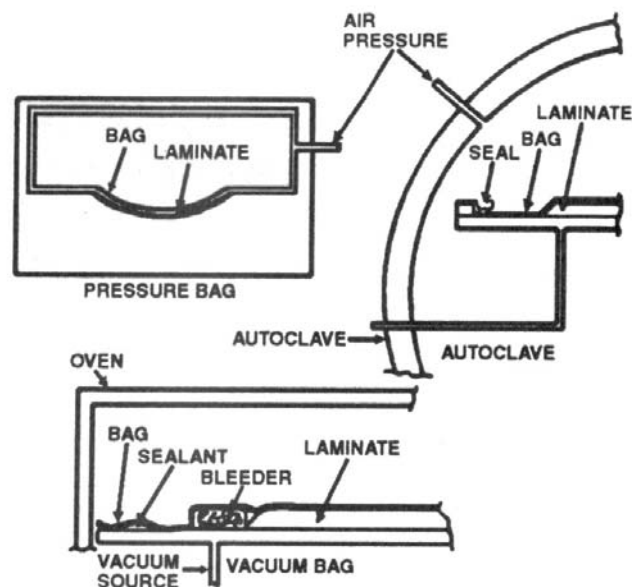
Vacuum bag, autoclave and pressure bag moulding [8]
